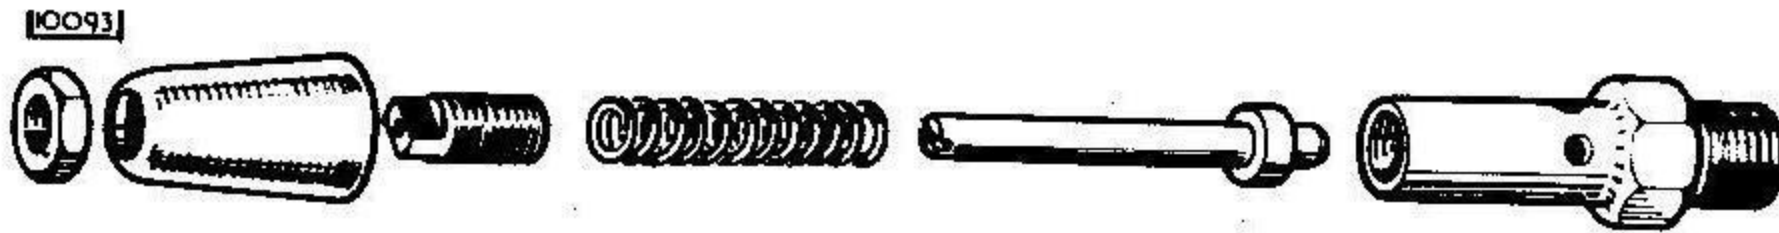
Exploded view of Clayton-Dewandre safety valve
